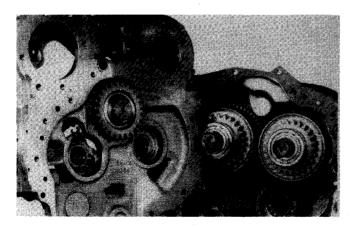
Install alignment studs in transmission housing to facilitate converter housing to transmission housing assembly.
